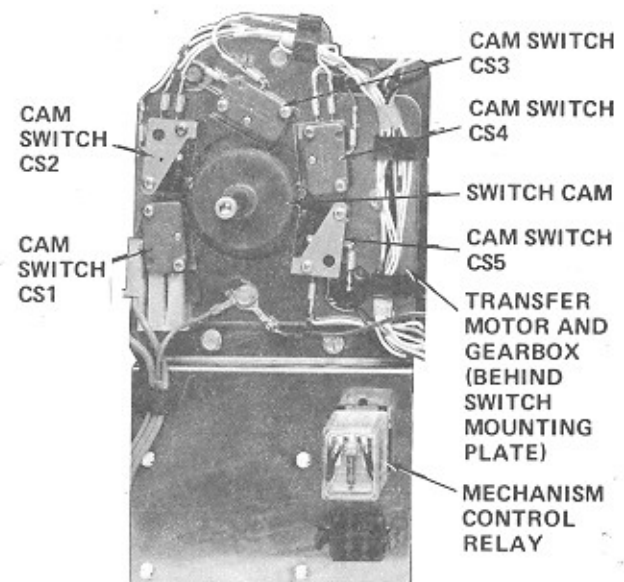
CAM SWITCH AND MOTOR ASSEMBLY COMPONENTS
